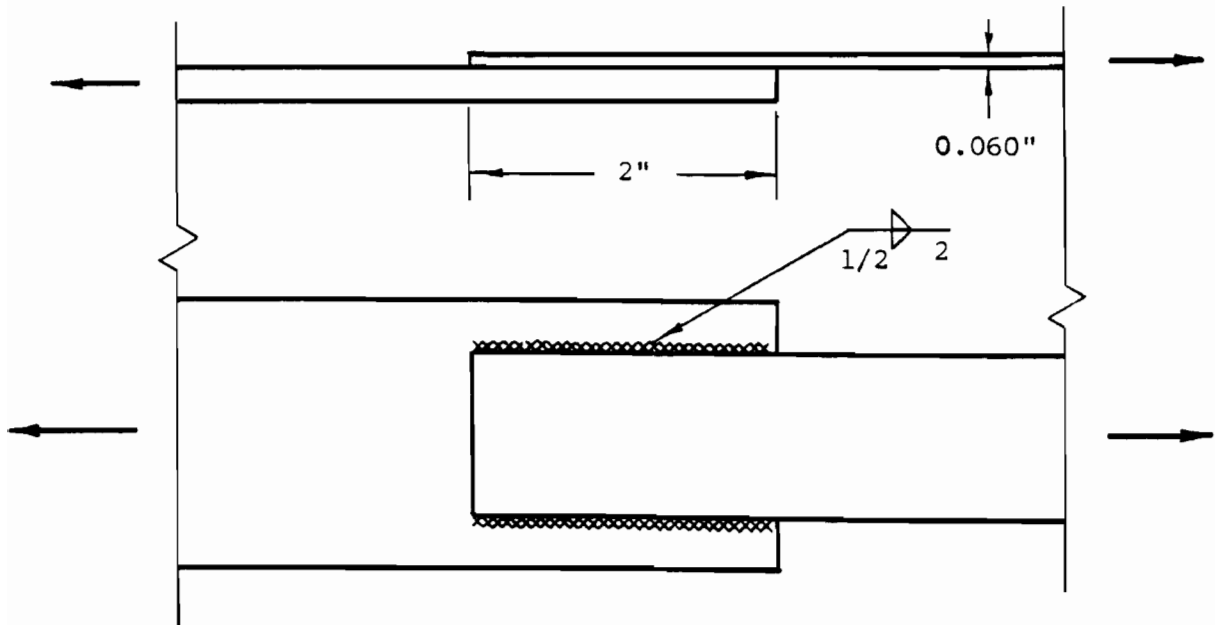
Fillet Welded Connection in Problem No. 9
